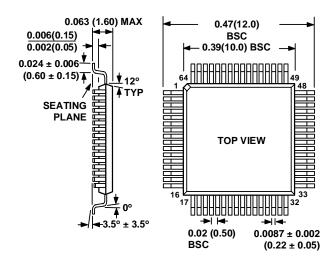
64-Lead LQF Package [LQFP] (S-64)—Dimensions shown in millimetres
